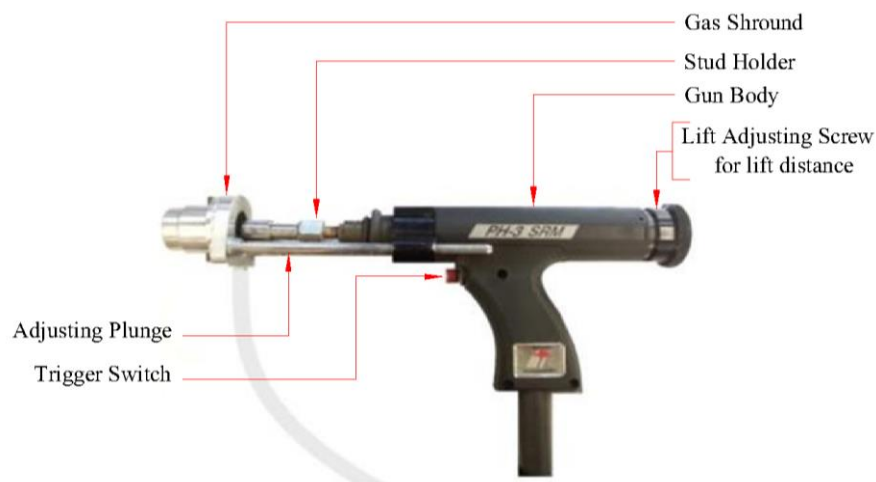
The SOYER Arc Stud Welding Machine Gun PH-3 SRM
